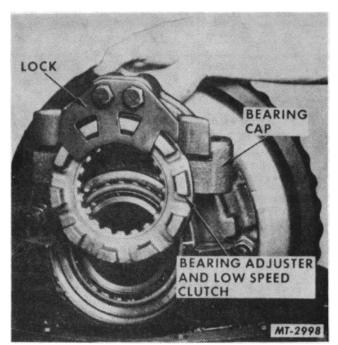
Removing Bearing Adjuster, Lock, and Cap.
